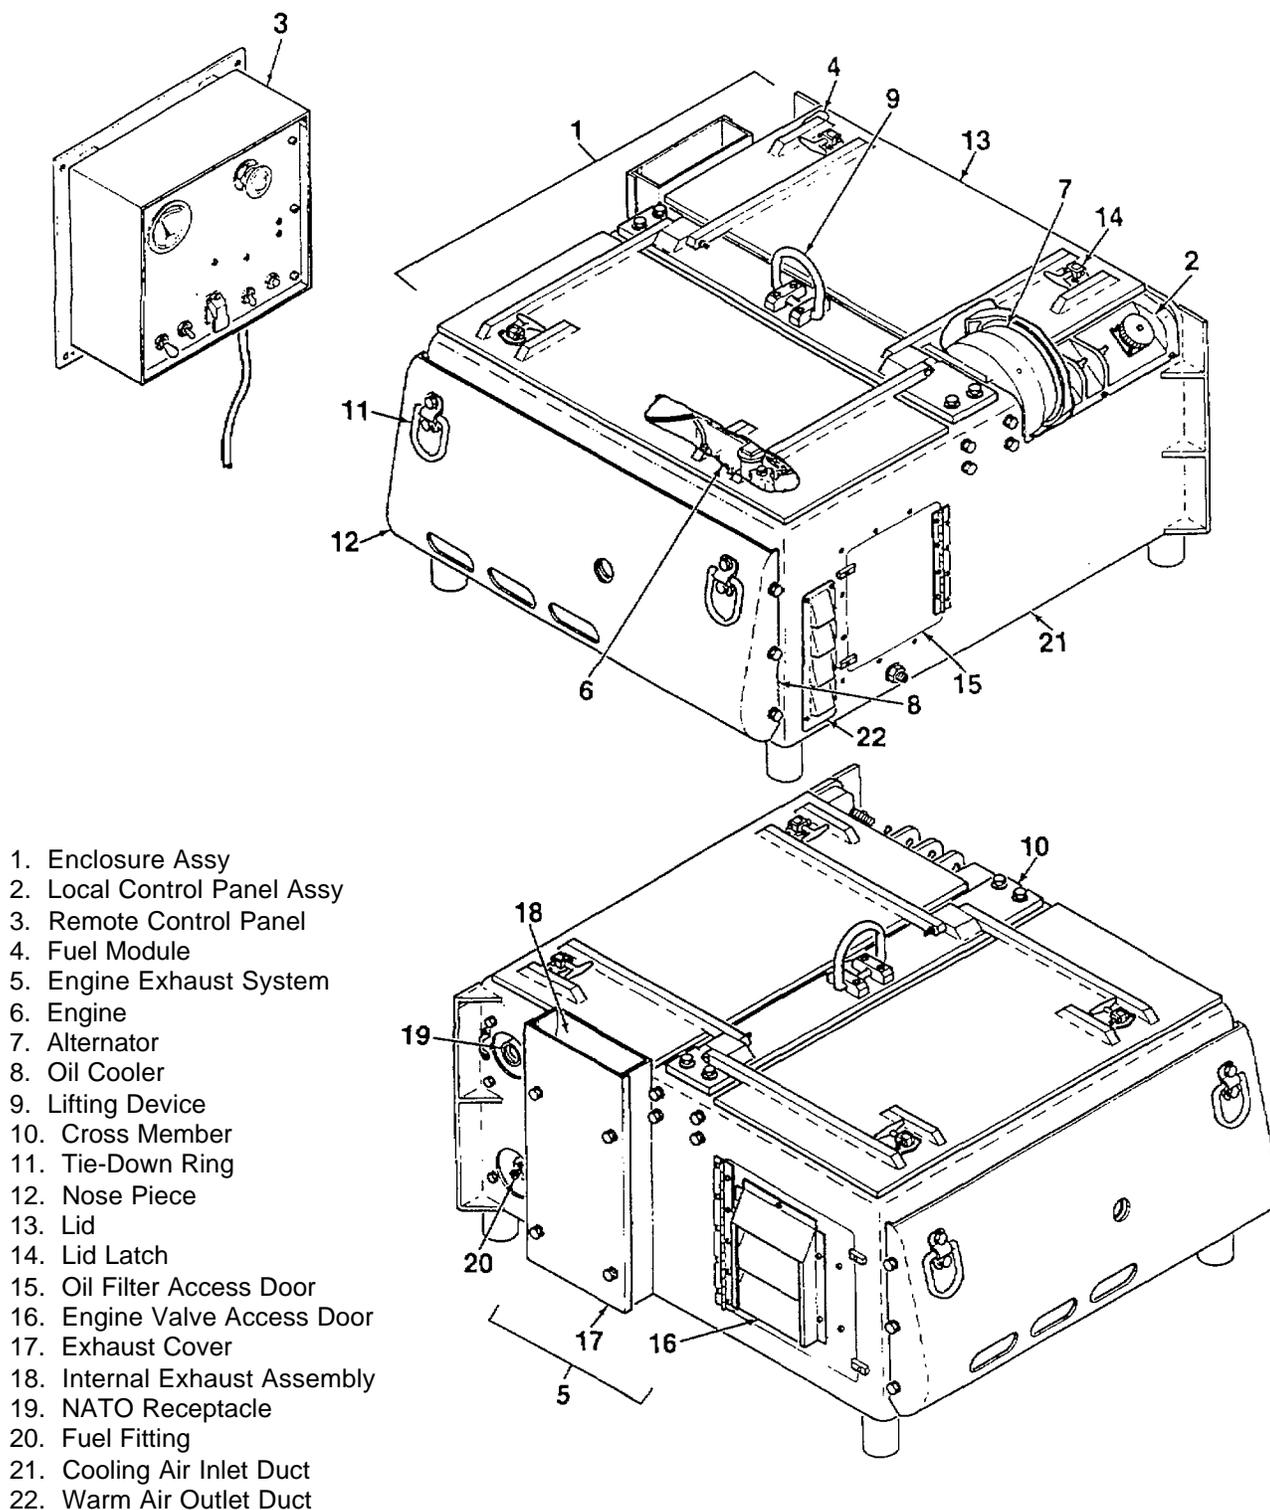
5kW, 28VDC, Diesel Engine Driven Auxiliary Power Unit (APU)
